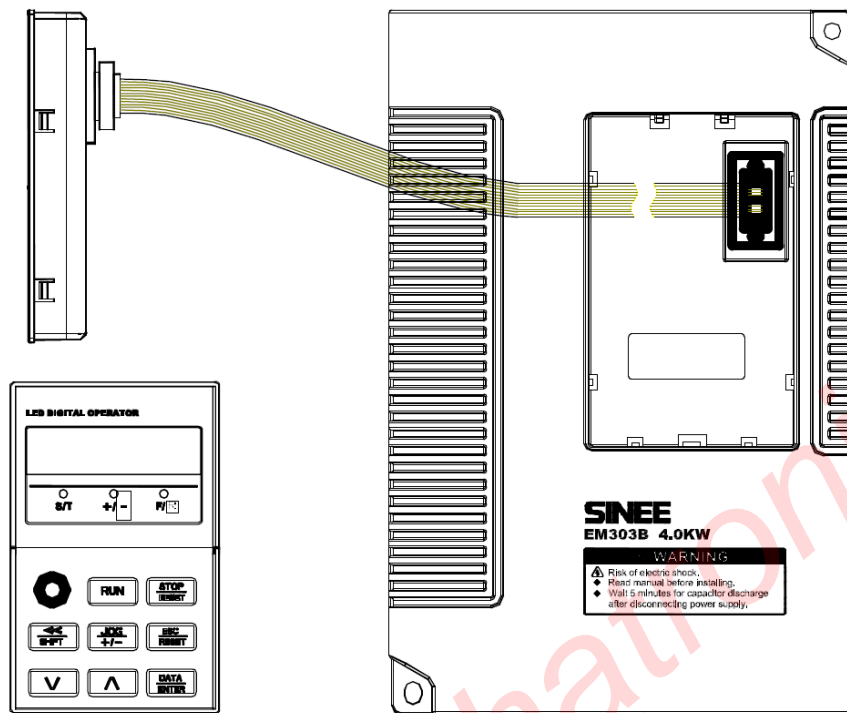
Disassemble the Keypad and Connect Extension Keypad Wire
